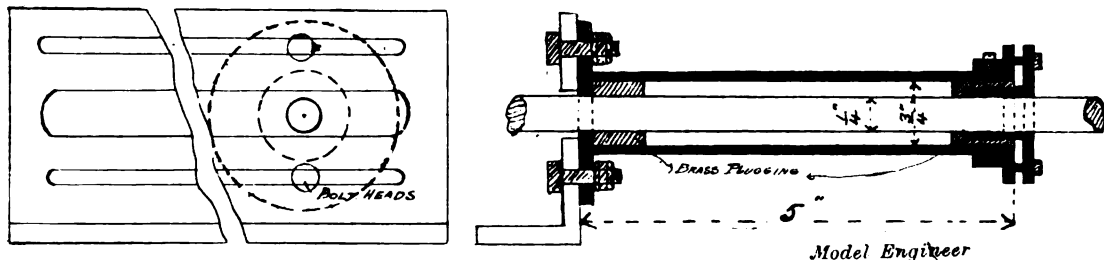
ANGLE PLATE AND (FIG. 6) STERN TUBE ARRANGEMENT.
